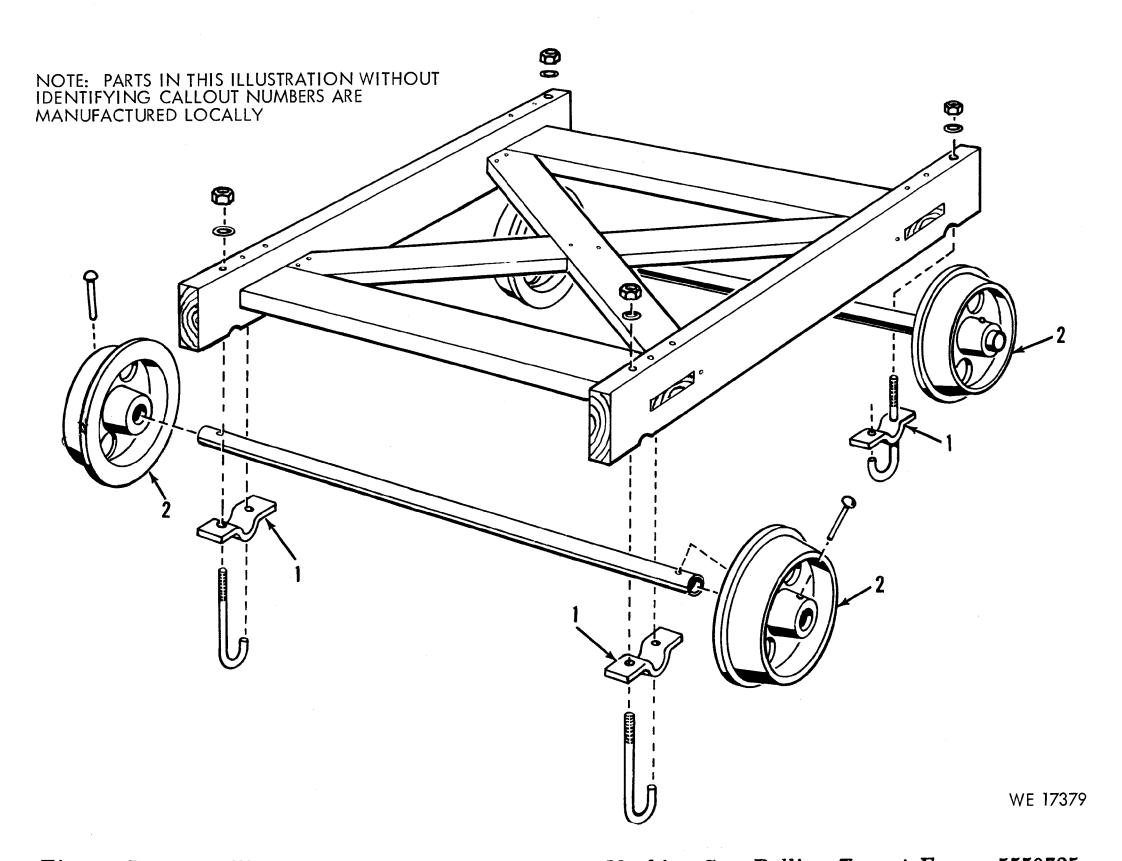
Rolling Target Car Assembly for Machine Gun Rolling Target Frame 5559725
